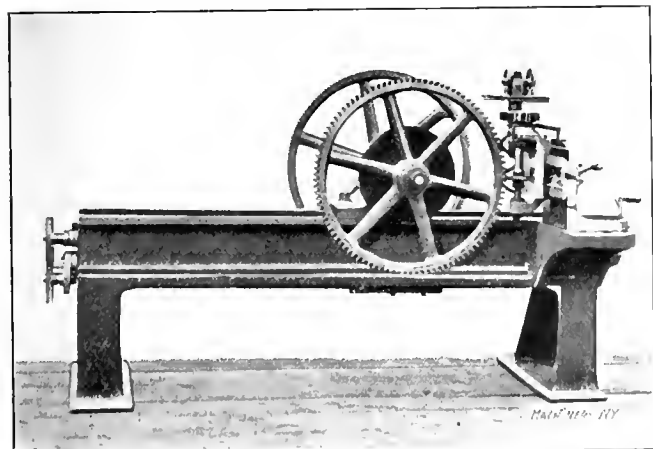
Gear-cutting Machine, Joseph Whitworth & Co. (1868)
